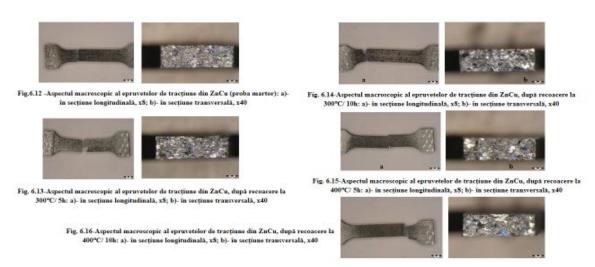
The macrostructural aspects of the tensile fracture surfaces of the ZnCu alloy specimens
